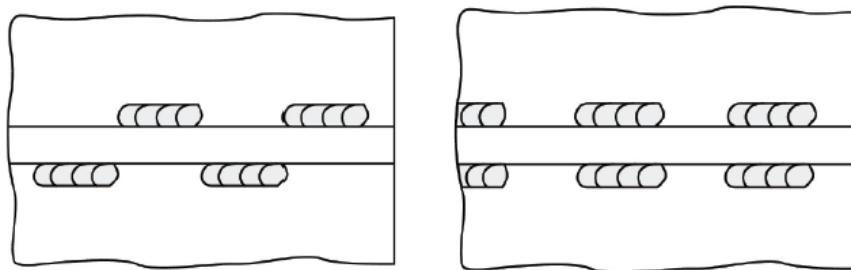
Staggered intermittent weld presented on the left and chain intermittent weld on the right (SFS 3052 2020, p. 42).
